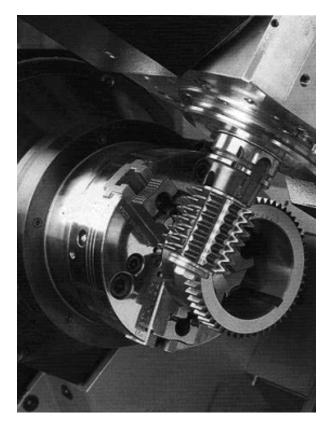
Tool and part in gear processing on a CNC lathe [10].
